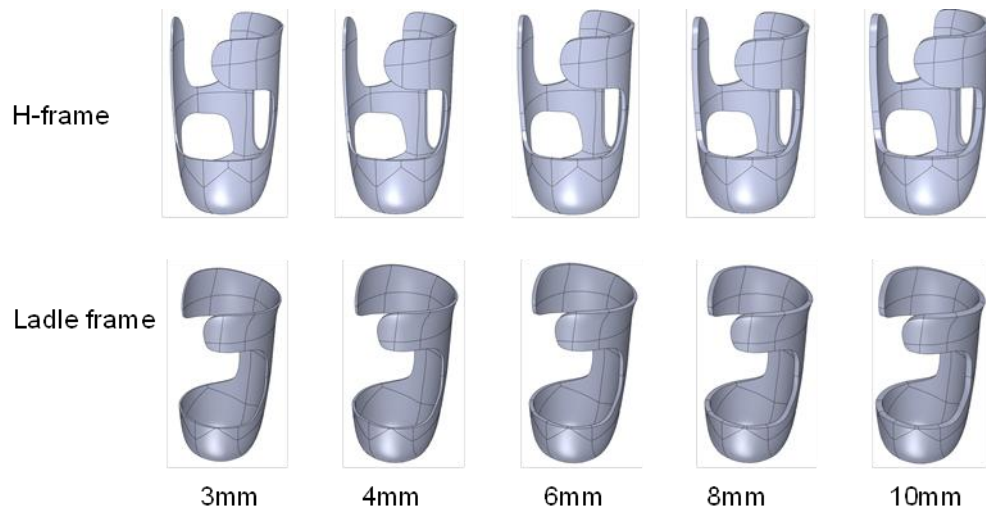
3D CAD model of the rigid frame of the prosthetic socket. The parameters varied are the frame design (H-frame and Ladle frame) as well as the thickness of each frame type (ranging from 3mm to 10mm).
